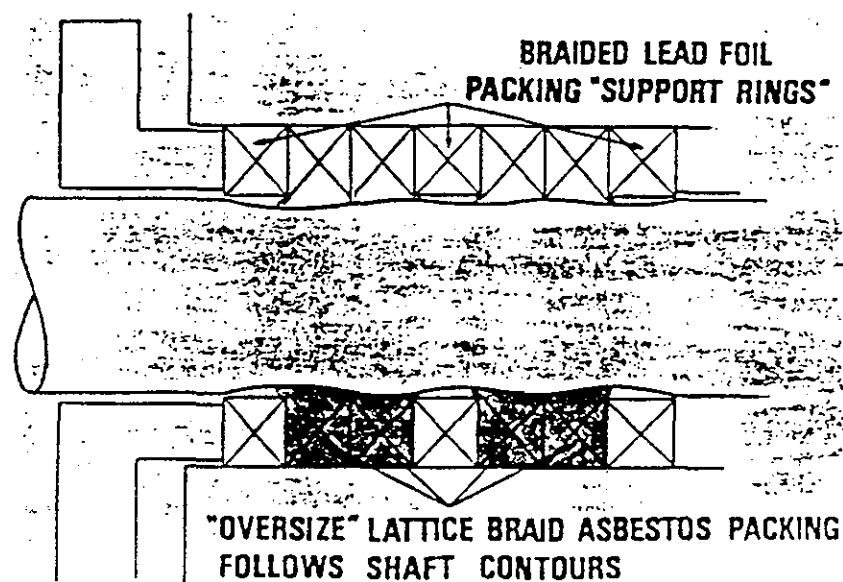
PACKING WORN SHAFT ON AGITATOR OR ROBERTS GRINDER.
